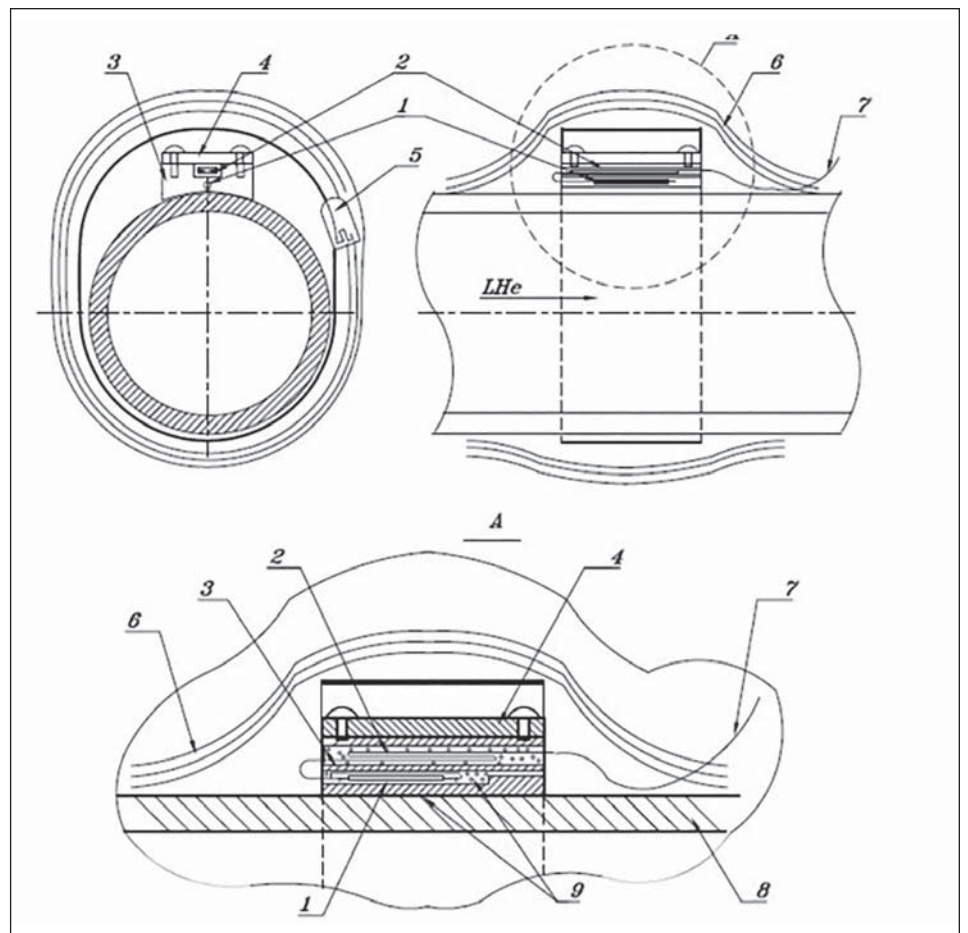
Thermometer mounting fixture on helium line.<sup>[4]</sup>
